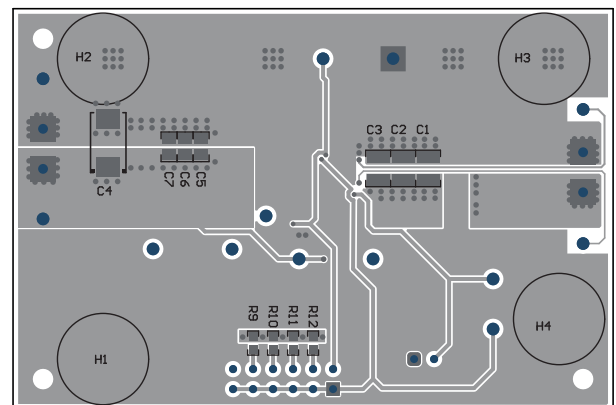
Bottom-Side Composite View (Viewed From Bottom)
